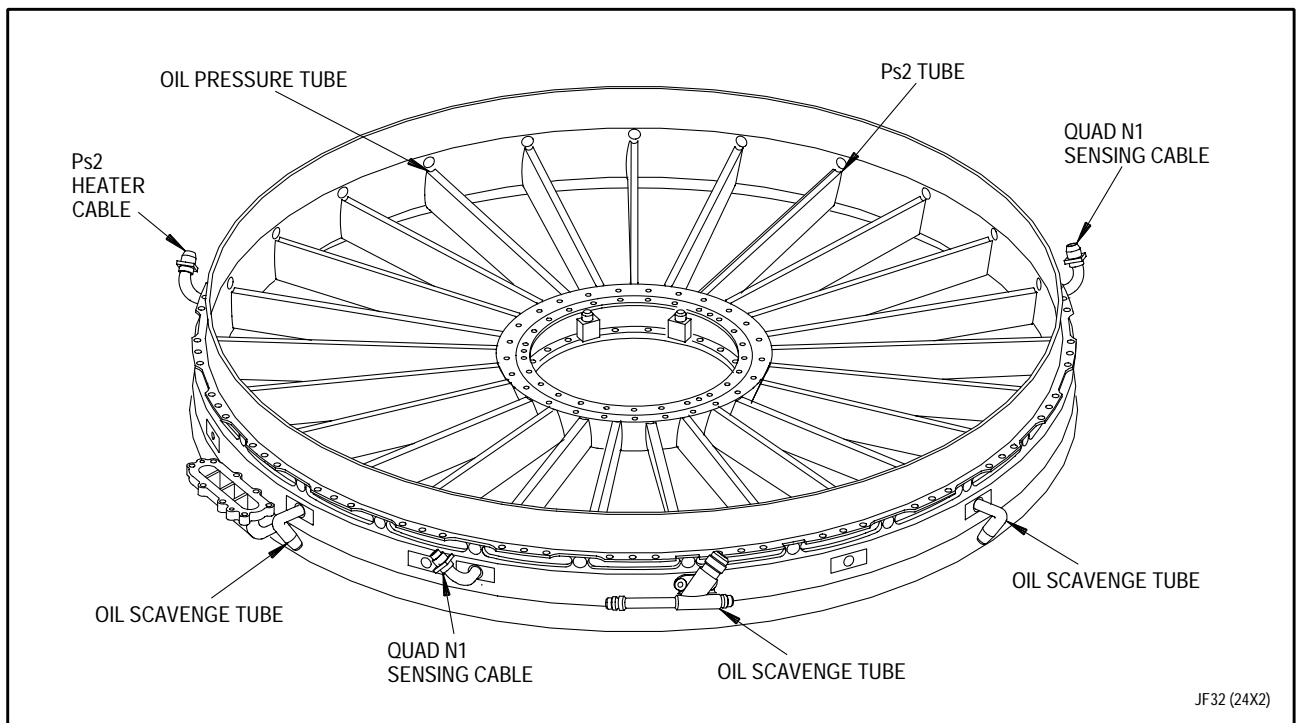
Front Compressor Stator Variable Inlet Vanes - Installation (Sheet 2 of 2)
